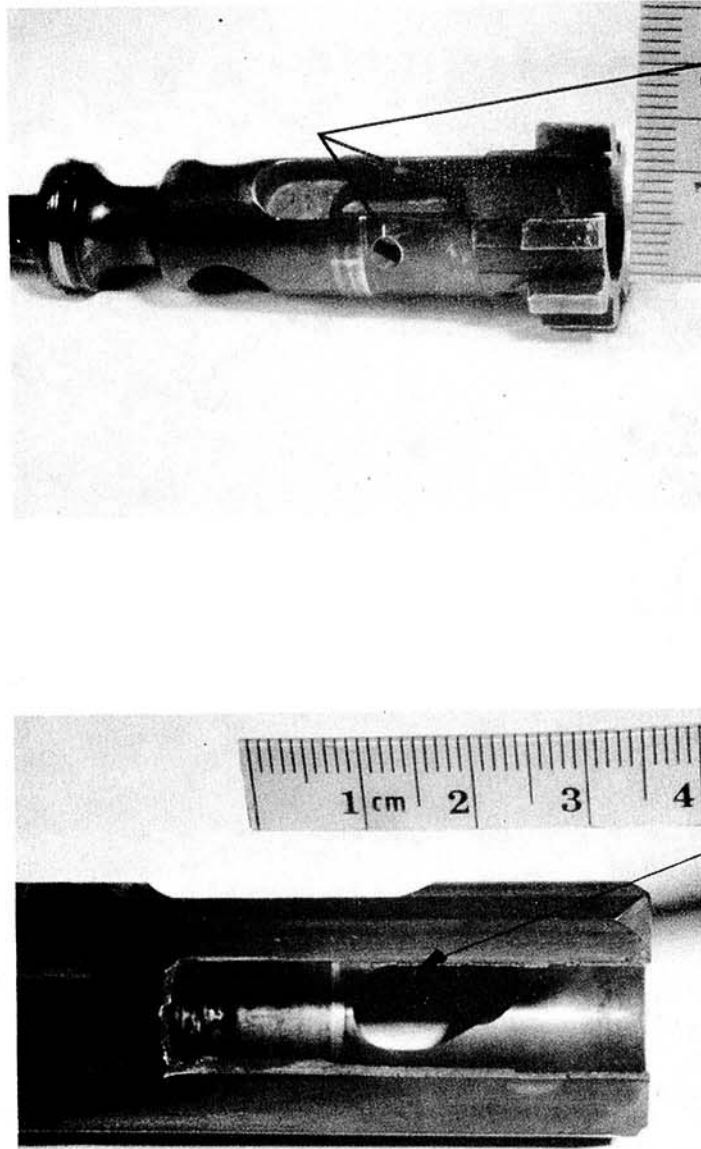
Showing cracking of extractor pin hole in bolt from Enhanced M16A2 rifle No. 3 (top view). Bottom of bolt carrier from same rifle (bottom view) showing location of broken out section. Both occurred after firing the rifle with water in the bore.
